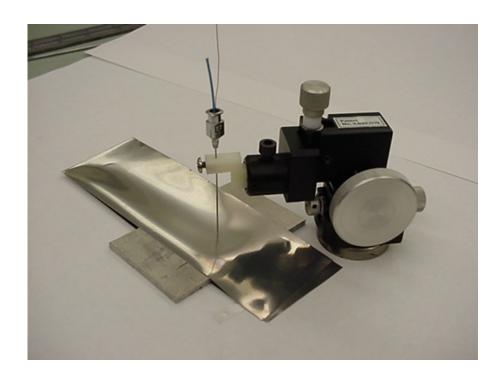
Photograph of set up used to hold and position potential wire prior to spot welding
